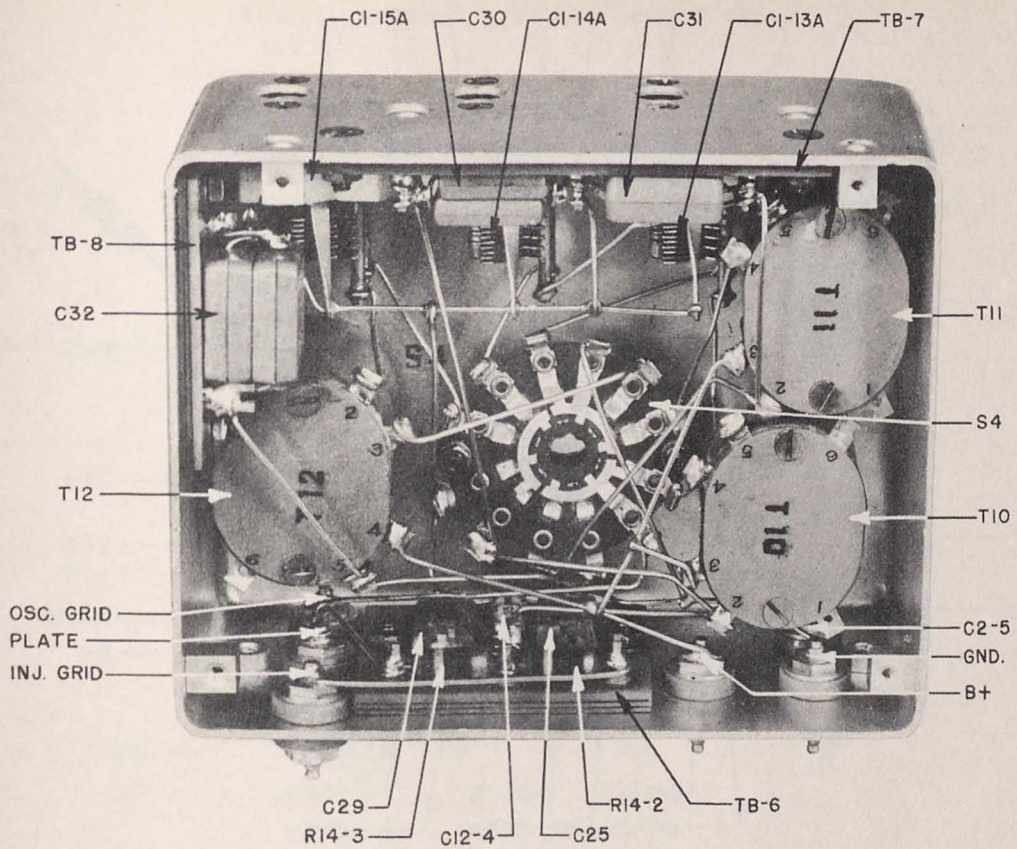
R.F. OSCILLATOR TUNING ASSEMBLY (107)
